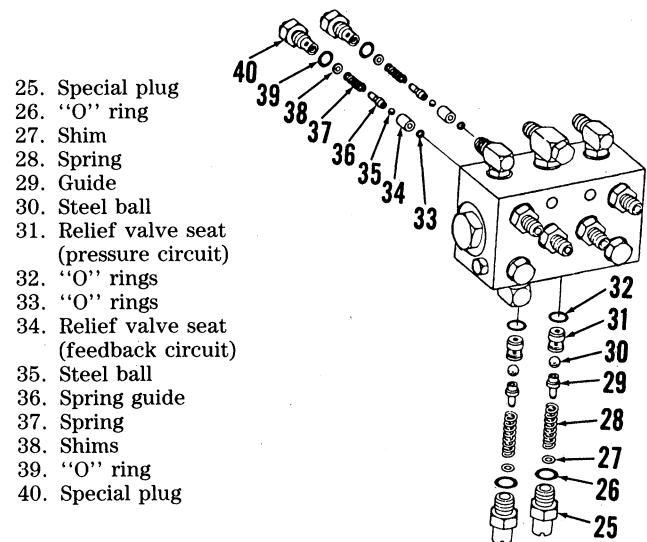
Additional relief valves are installed in pressure and feedback circuits in steering control valve used on tractors with mechanical front-wheel drive.
